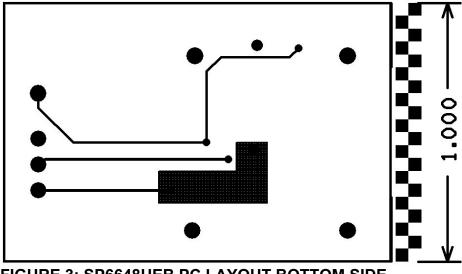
SP6648UEB PC LAYOUT BOTTOM SIDE
